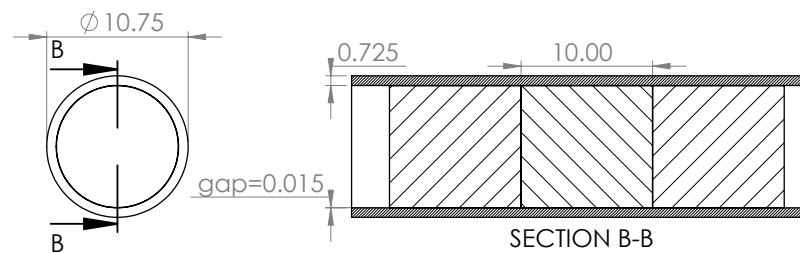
Technical drawing illustrating main dimensions of the surrogate rodlets used in the analogue studies.
